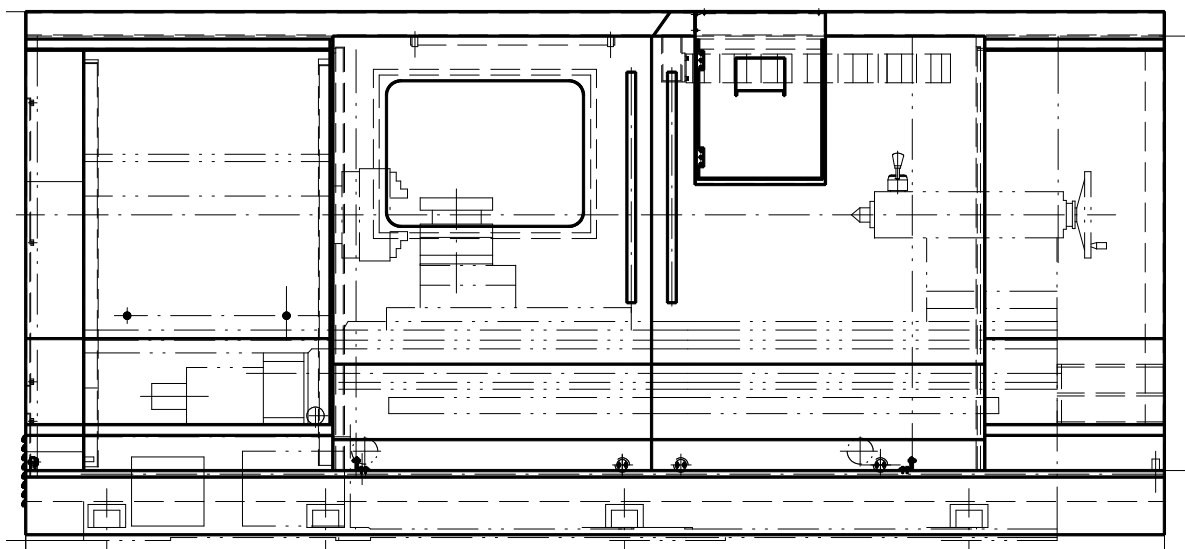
Appearance view for the machine with full-enclosure protection (1500 mm)
